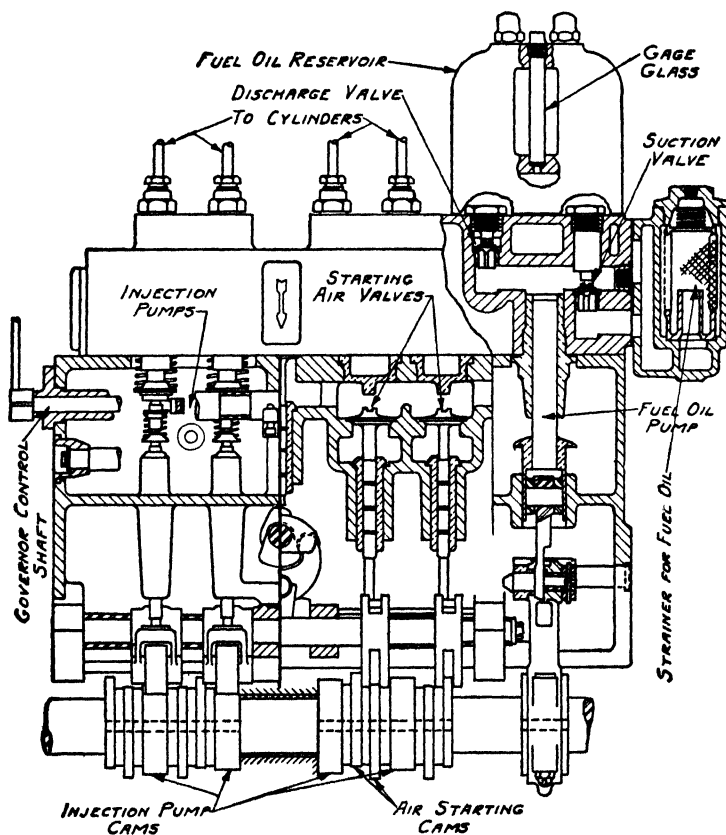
Longitudinal Section Through Fuel Pump and Starting Valve Unit, Fairbanks-Morse Marine Engine
